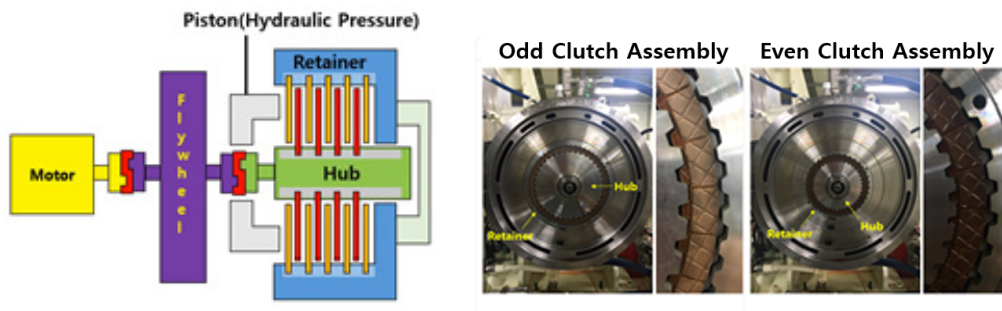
SAE NO#2 Test Machine Operating Mechanism & Wet Friction Pad Assembly Status
